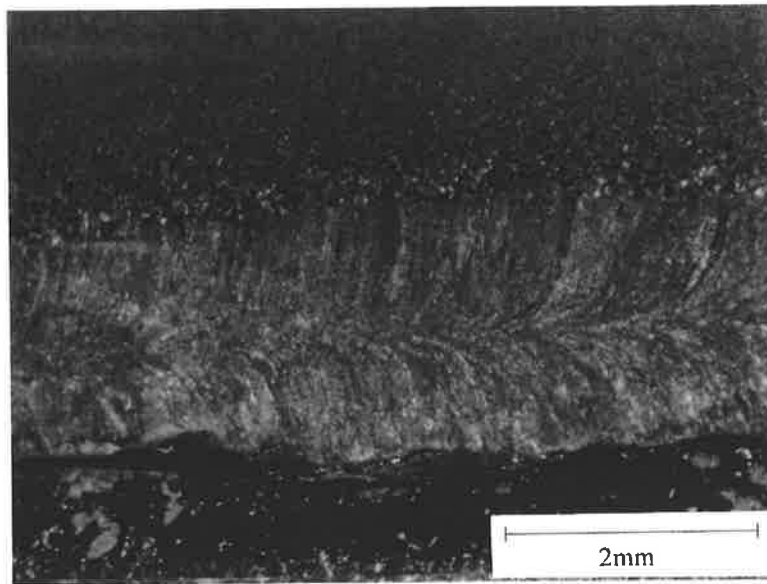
Longitudinal horizontal section of a weld made at 400mm/min and 133A (heat input equal to 0.44kJ/mm). No hollow bead formed in this weld.
